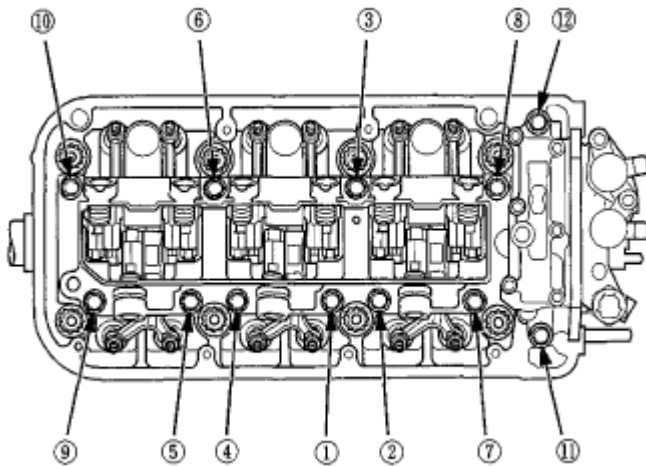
Identifying Mounting Bolts Tightening Sequence
